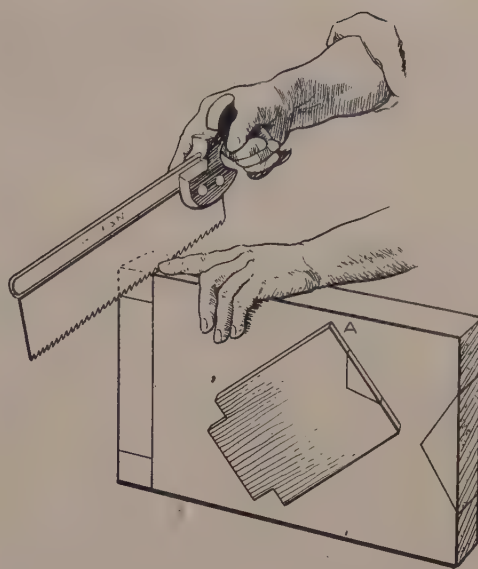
METHOD OF SAWING CORNERS (SAWING V CUTS IN INSET).
